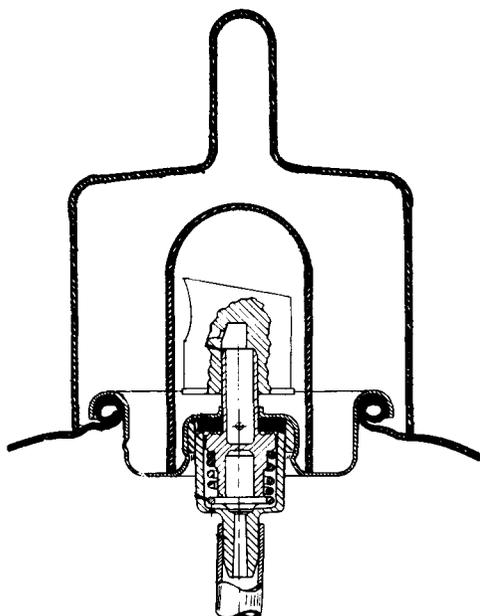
Cross Sectional View, Showing Aerosol Valve with Stem Gasket and Cup Gasket Eudiometers
